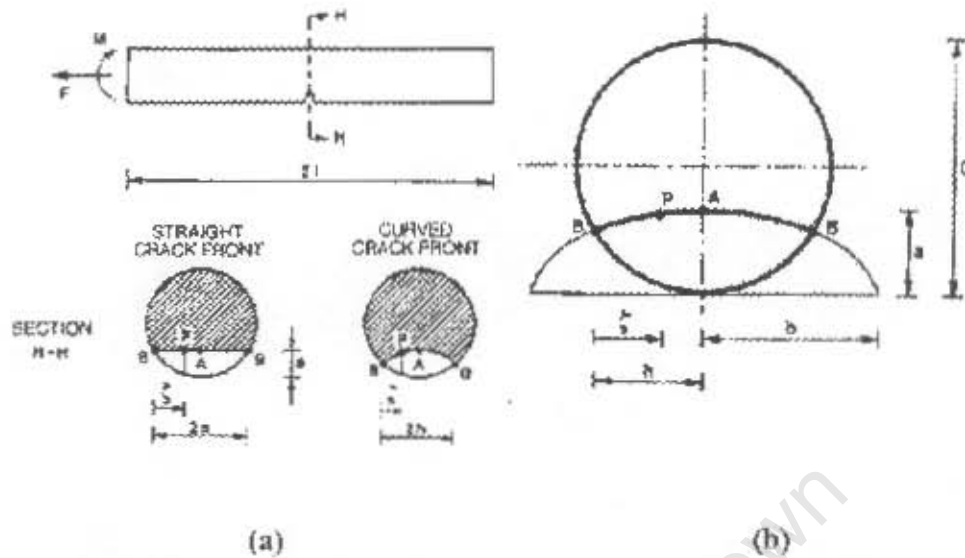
(a) Cylindrical shaped structural component with straight front crack and curved fronted cracks.
